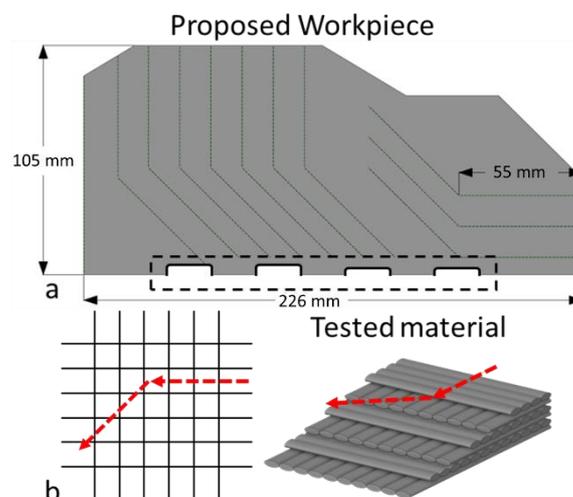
Proposed workpiece: a) Workpiece dimensions and cutting movements; b) Fiber alignment of the used material and the executed movements during the test.
